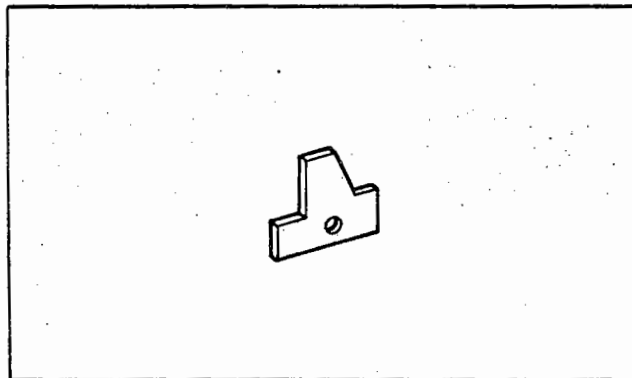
T25941 Enrichment Valve Screw Adjusting Assembly Gage
